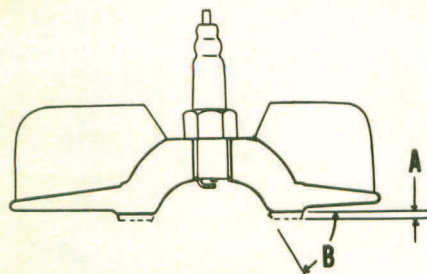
Angle of taper (B) must be remachined in head after it has been modified for higher compression.
